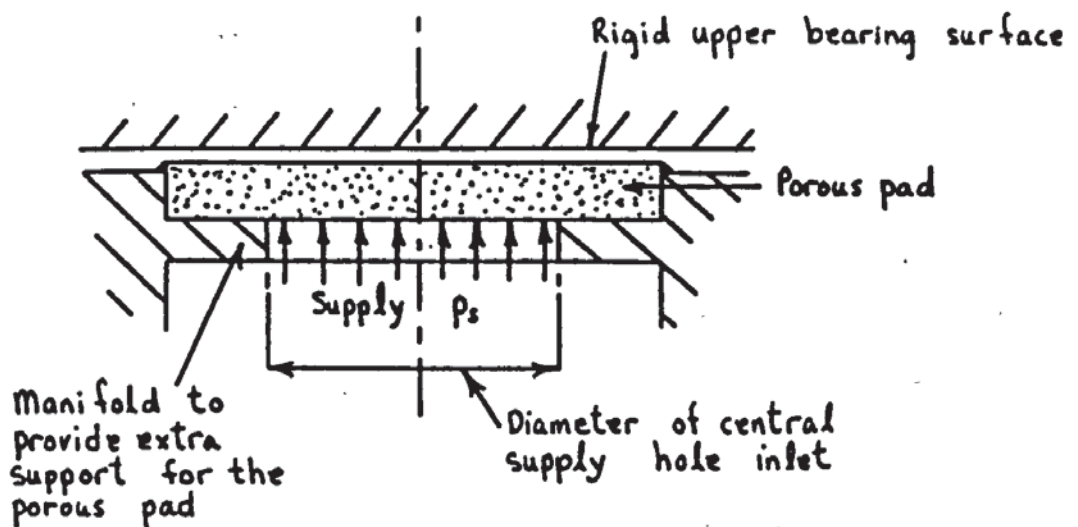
Porous aerostatic thrust bearing with inlet manifold
